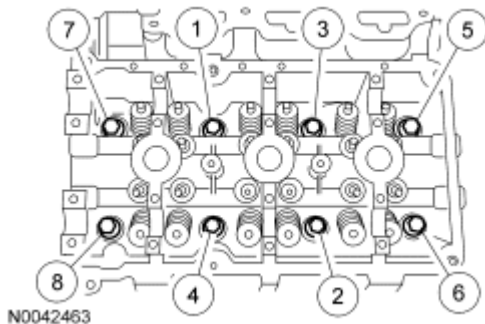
Identifying Tightening Sequence Of Cylinder Head Bolts
